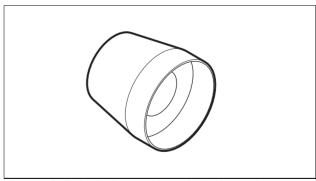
Cylinder Seal Assembly Tool, P/N 0696168
